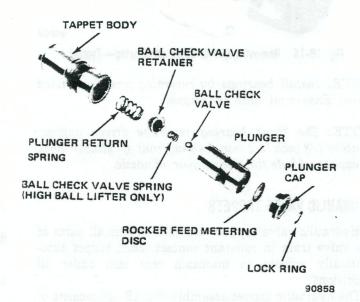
B-17 Hydraulic Valve Tappet—Exploded View
